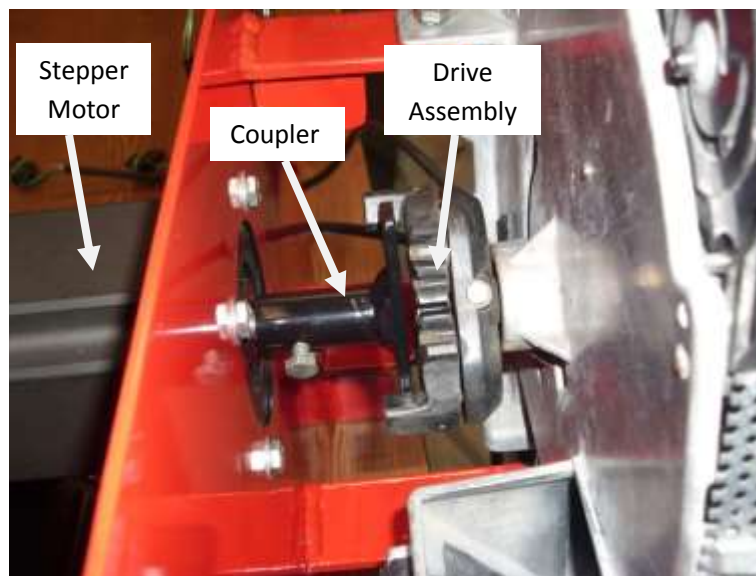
COUPLER BETWEEN MOTOR AND PLANTER UNIT
